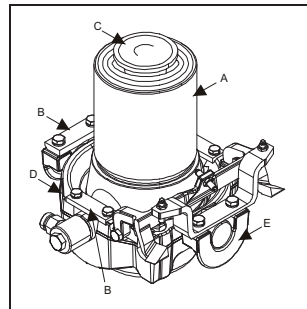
CYLINDER ASSEMBLY COMPONENTS
